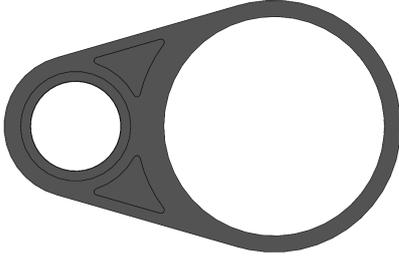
Section view of hydraulic tube with accumulator tube and connecting triangular cavities
